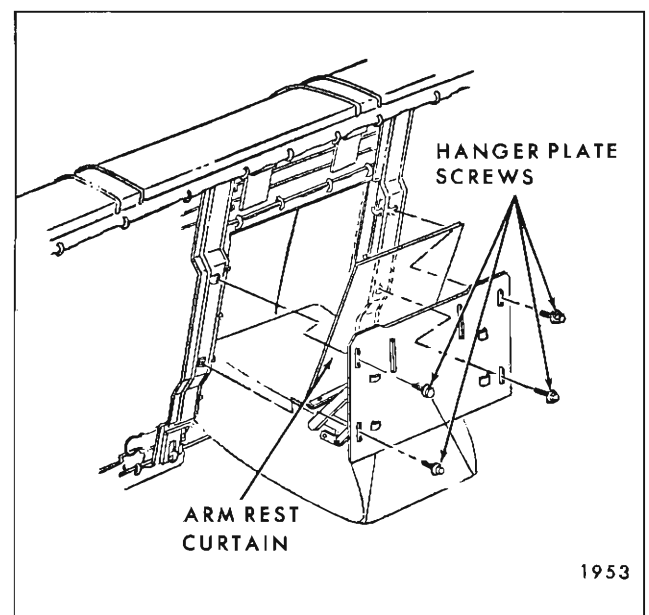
H52—Rear Seat Back Arm Rest and Hanger Plate
